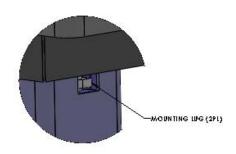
LANYARD AND MOUNTING LUG SCREW DETAILS
